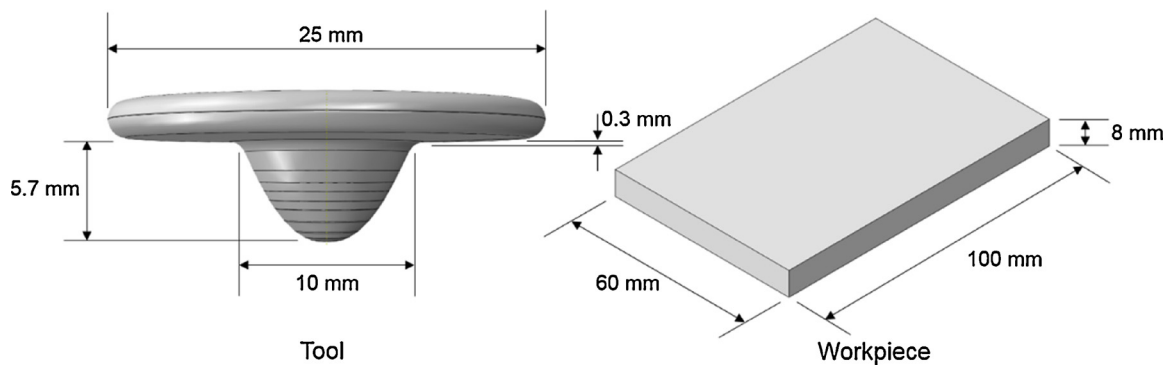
Simplified tool and workpiece geometrical dimensions.
